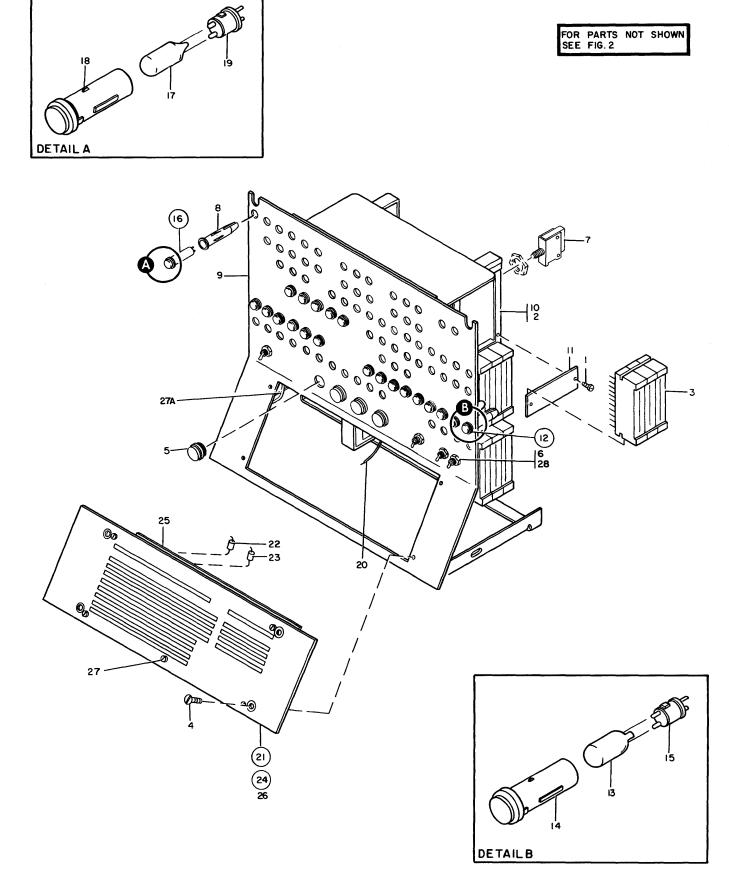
C E PANEL ASSEMBLY. SEE LIST 23.
